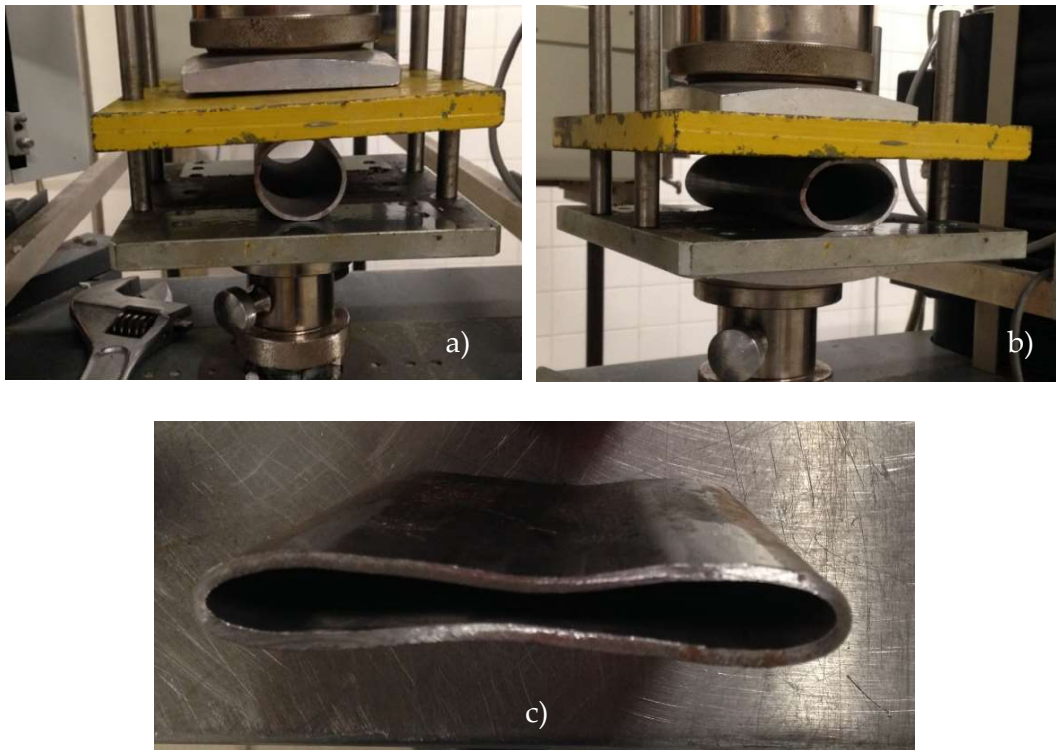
Sequence of the compression test a) tube before suffers any deformation; b) tube while being deformed; c) tube totally deformed
